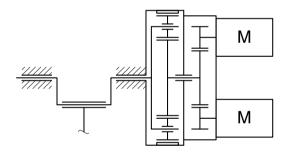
Connection diagram of direct drive with planetary gear to eccentric shaft of press.
